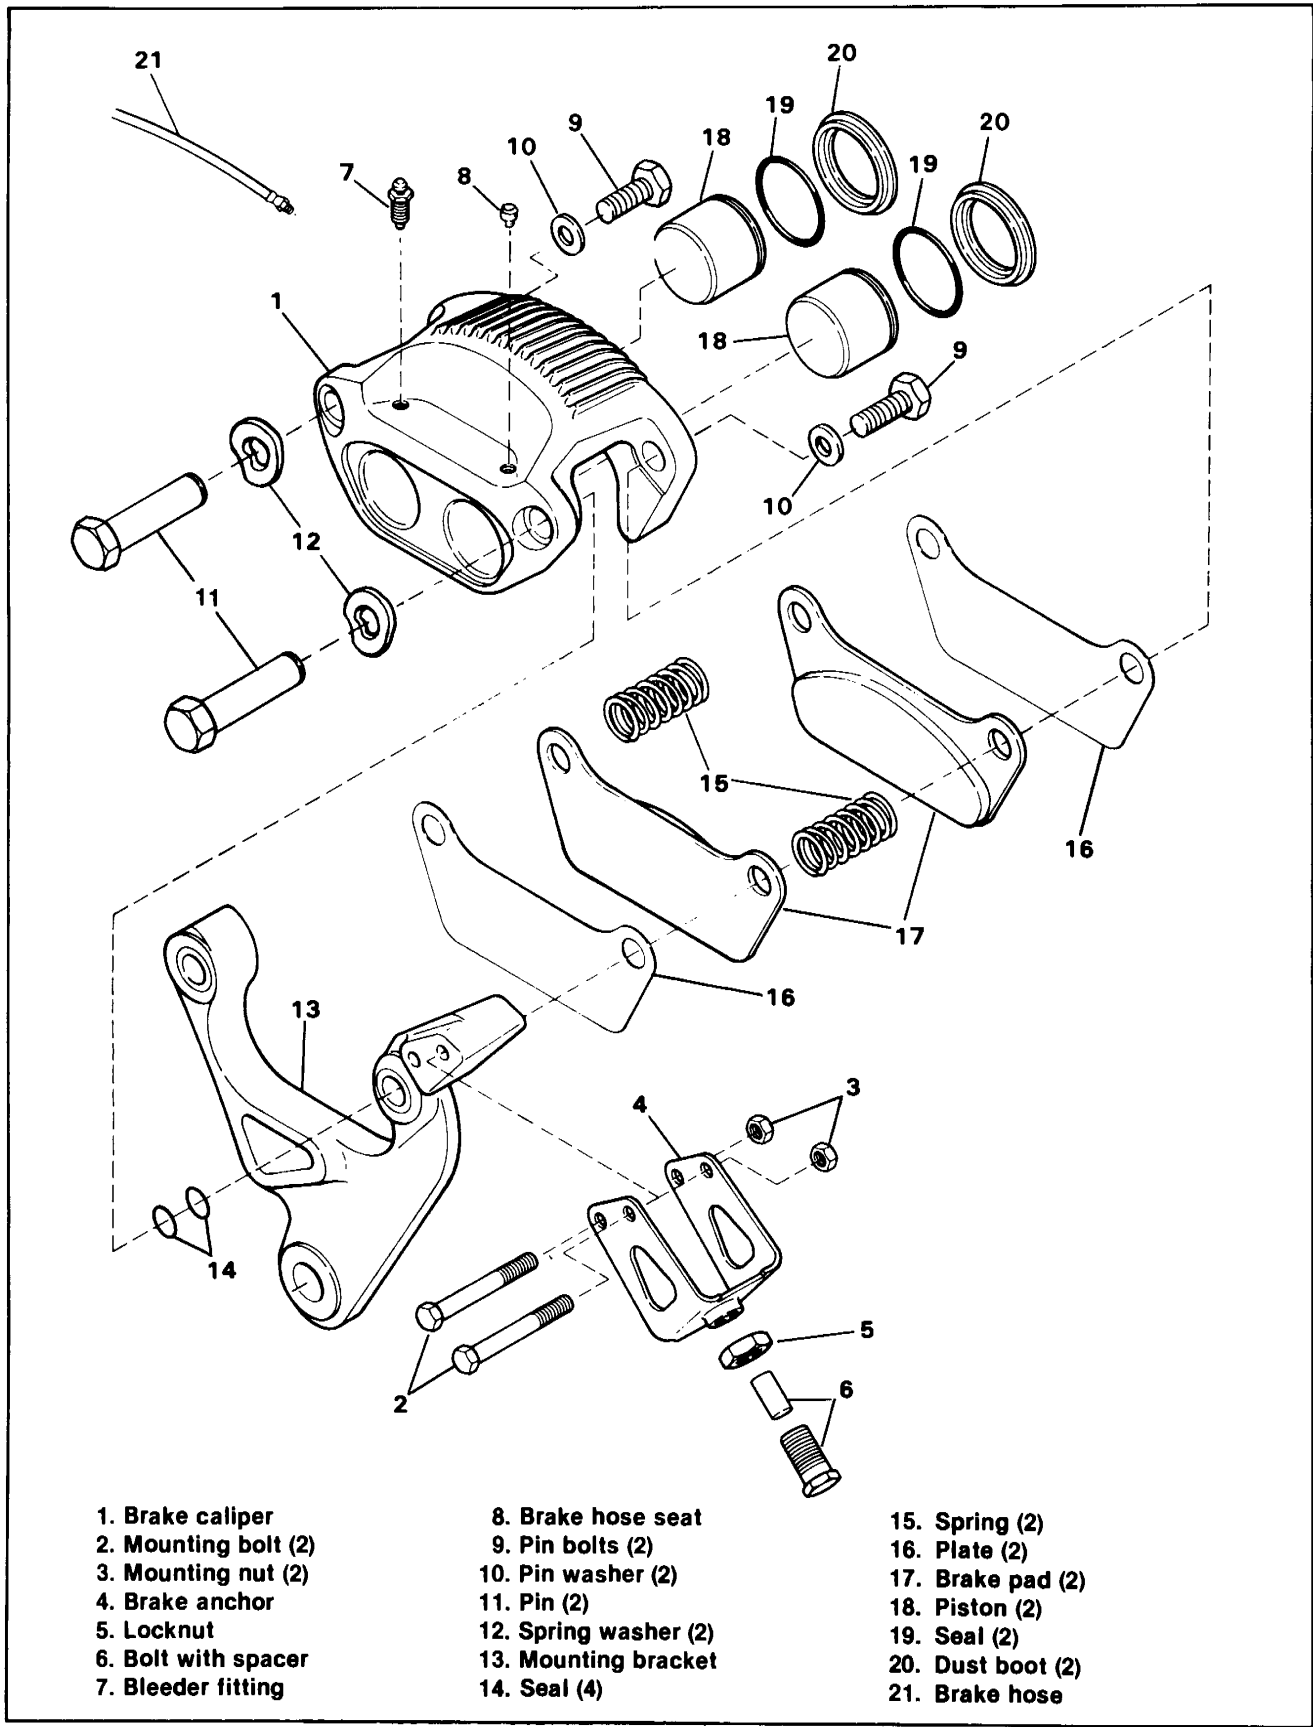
Rear Caliper — 1984, 1985 FLT Models
